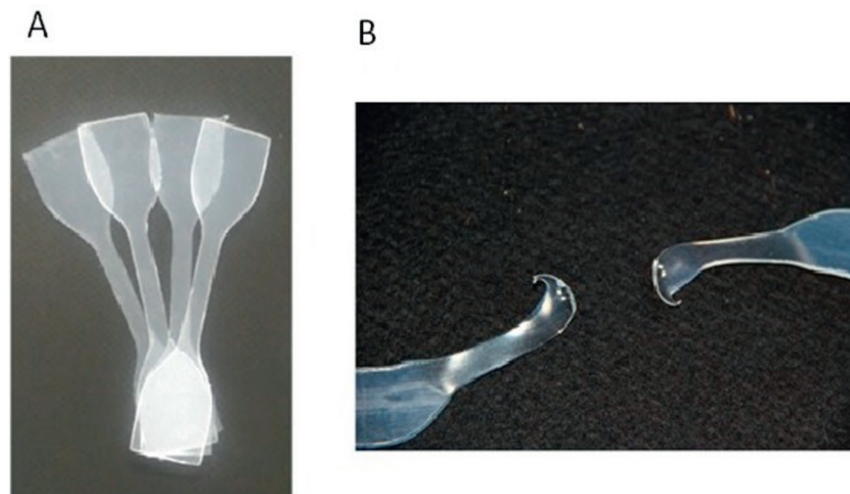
(A) EVA specimens for tensile test. (B) Detail of the specimen after failure.
